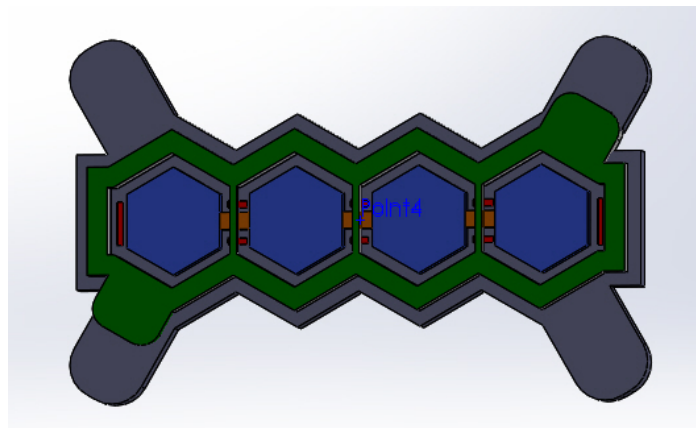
Solidworks drawing of 3D printed two-part mould of the hexagonal mini-bladder unit.
